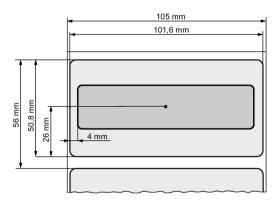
SIMATIC RF630L 6GT2810-2AB01 dimension drawing
